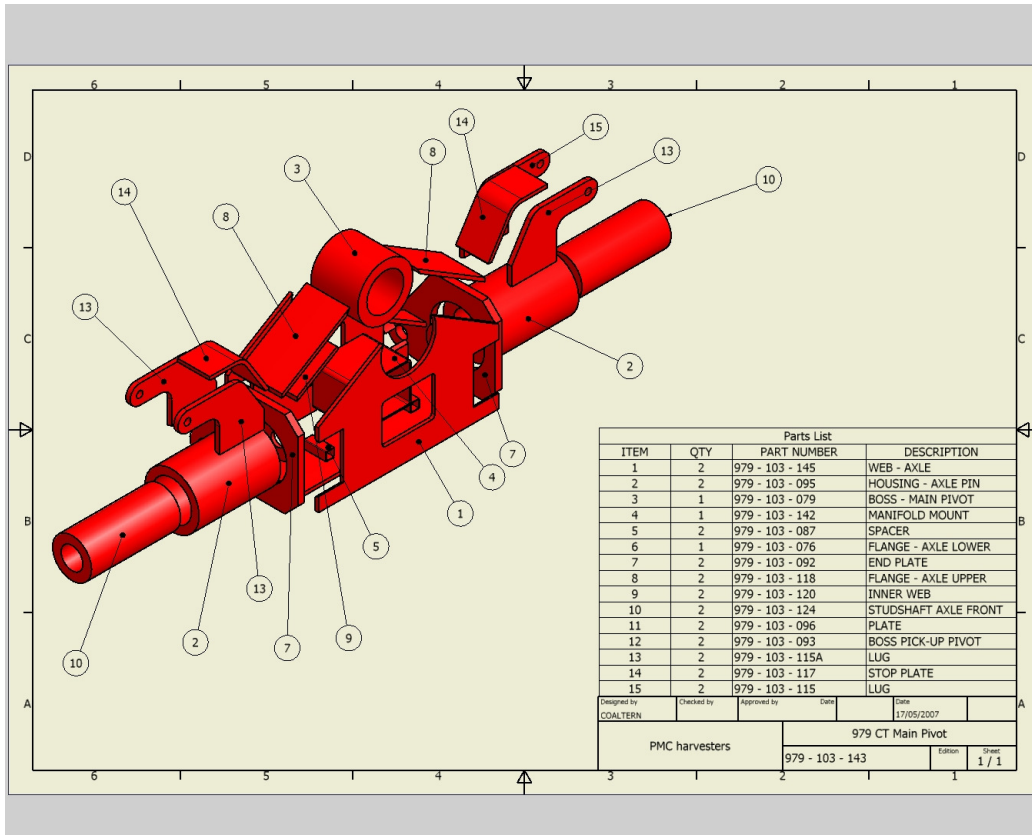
Exploded drawing sheet for 979 CT main pivot
